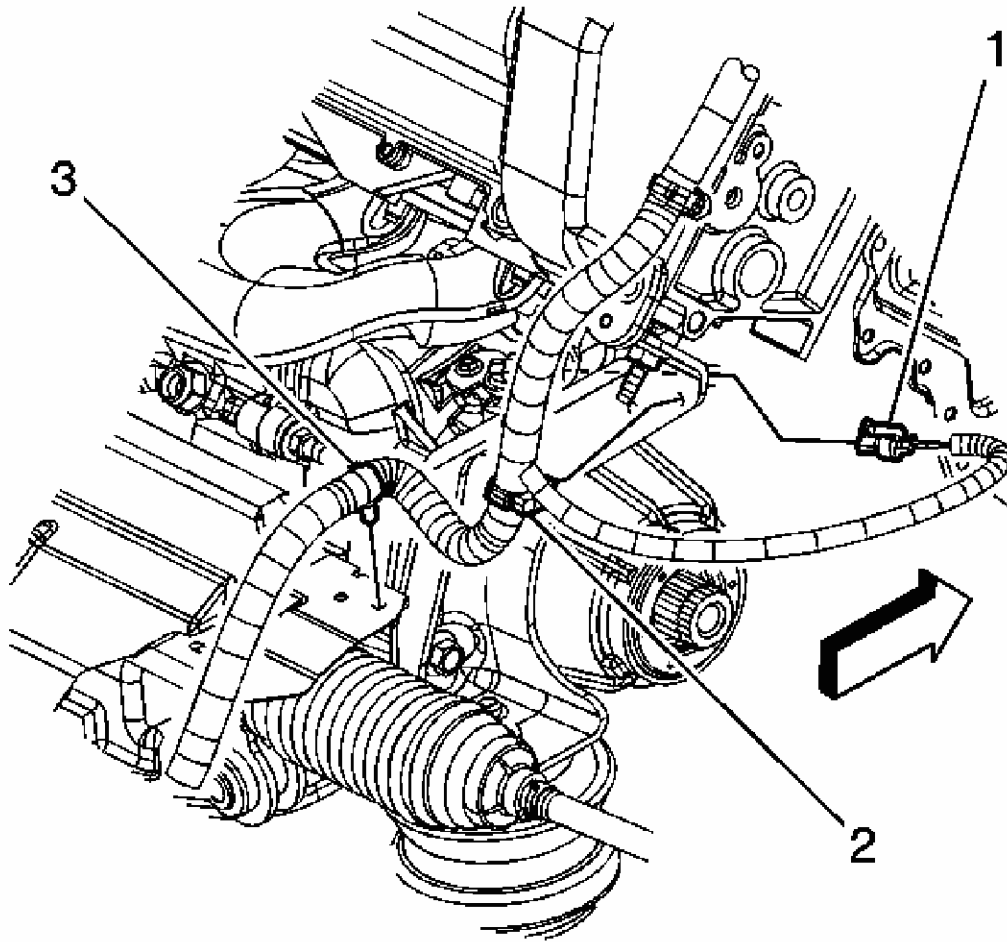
Disconnecting/Connecting Engine Harness Clip At Steering Gear Heat Shield
